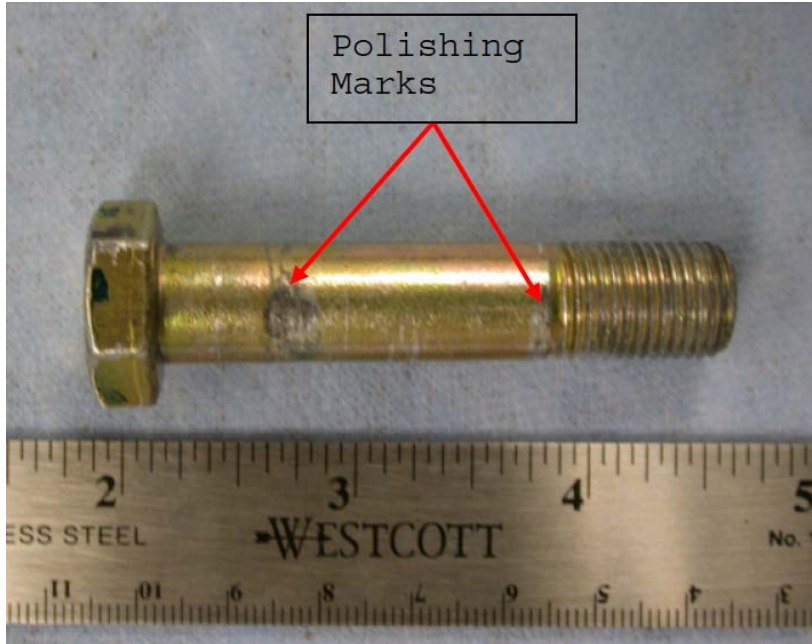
Polishing Marks on Bolt, this bolt shows no corrosion
